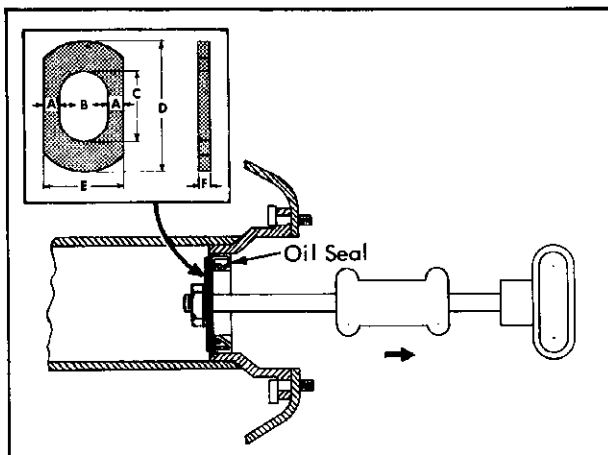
Rear Axle Oil Seal Removal Tool
